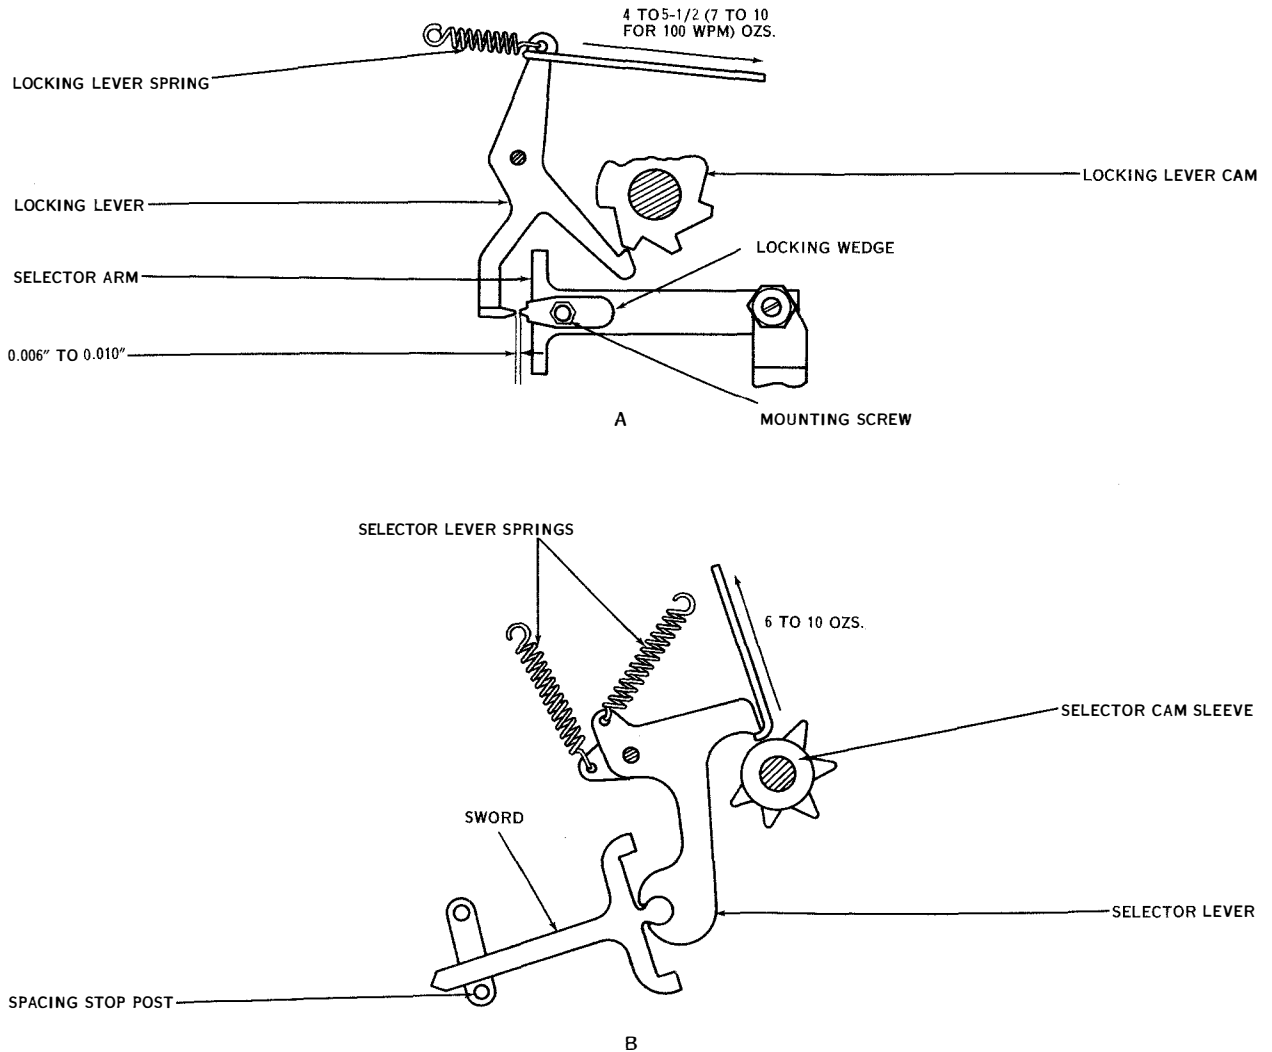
Selector Lever Spring Tension and Locking Wedge
